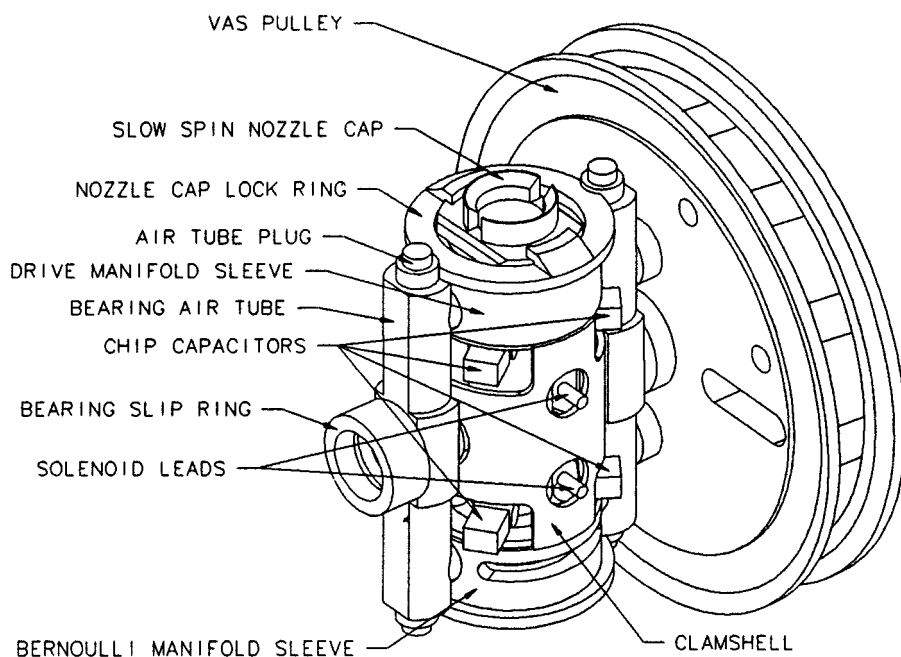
XC5 HR MAS/VAS spinner assembly, with coil cover shells, slow MAS version.
